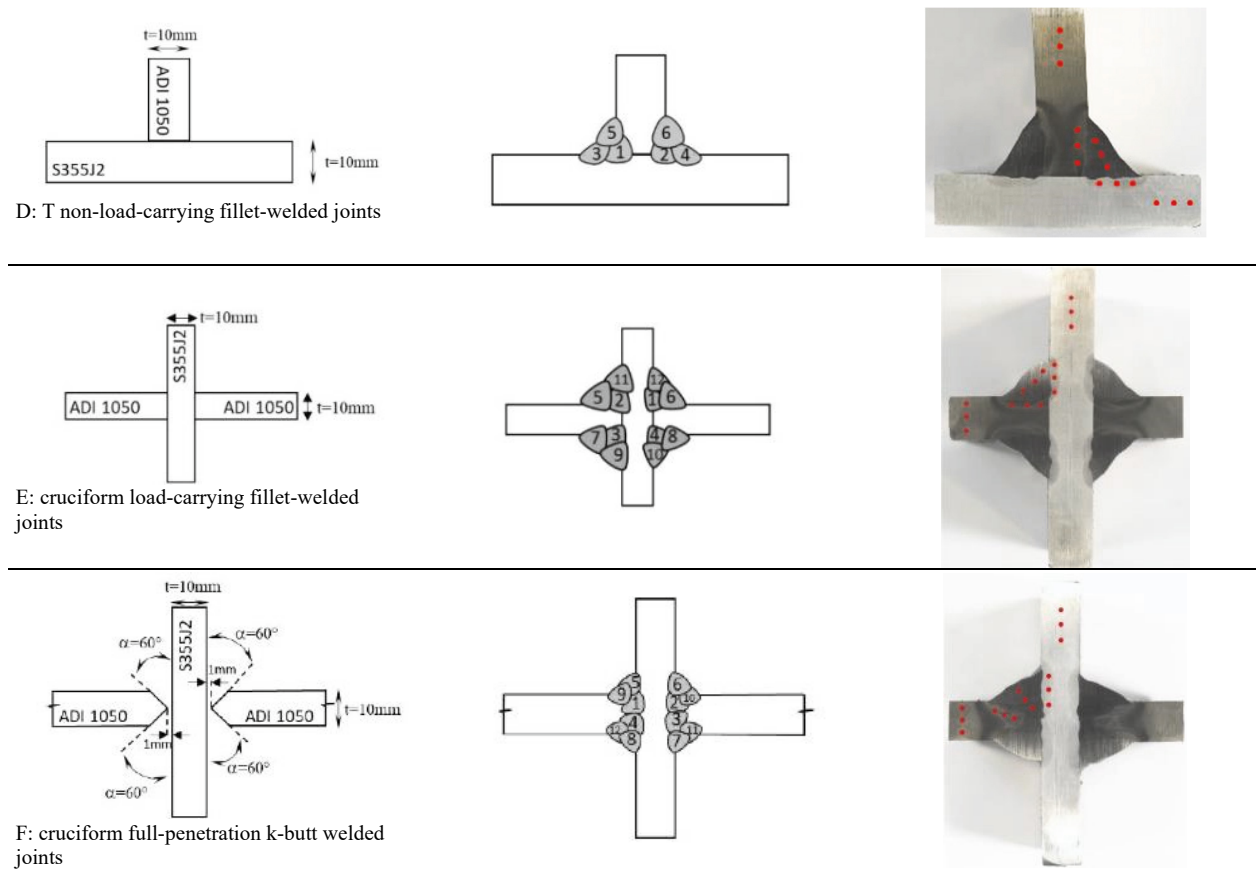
Geometries and loading conditions of dissimilar welded joints tested under fatigue loading.
